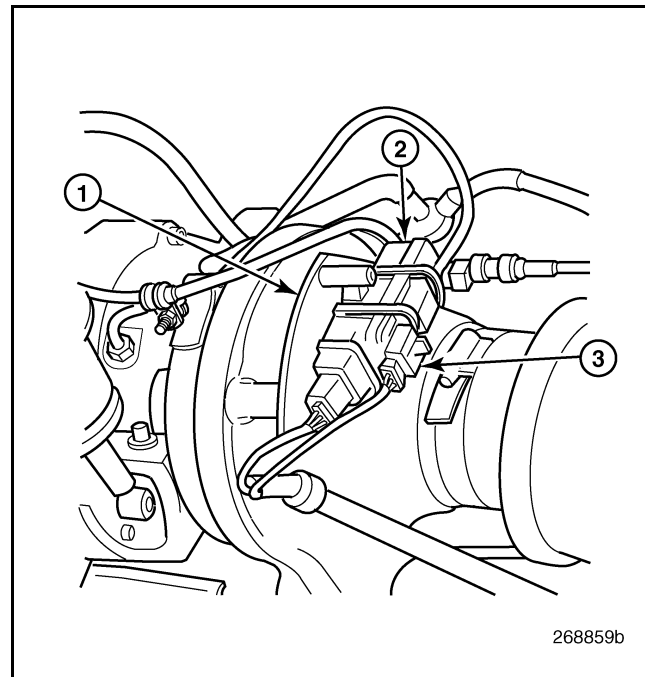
Position Sensor Module and Thermal Isolation Plate Assembly
